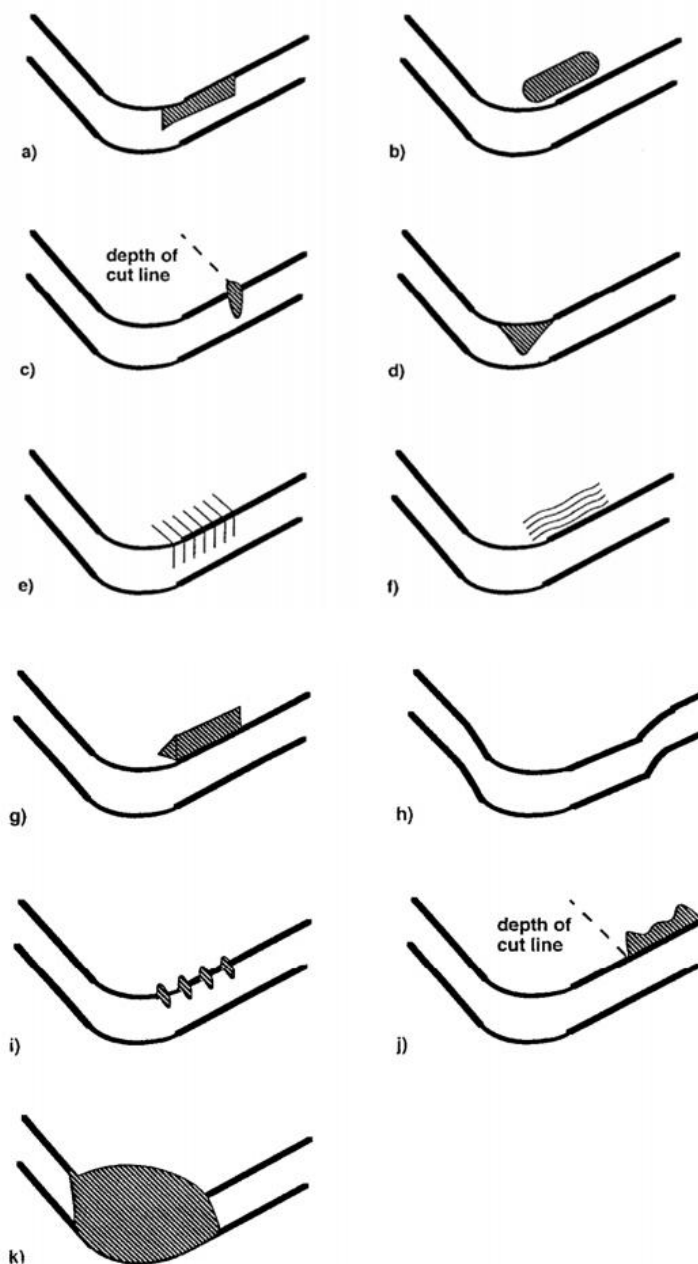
Tool wear types: (a) Flank wear; (b) Crater Wear; (c) Notch wear; (d) Nose Wear; (e) Comb cracking (thermal); (f) Parallel cracking (mechanical); (g) Built-up edge; (h) Gross plastic deformation; (i) Minor chipping; (j) Chip hammering; (k) Major chipping/gross fracture (Stephenson & Agapiou, 1997)
